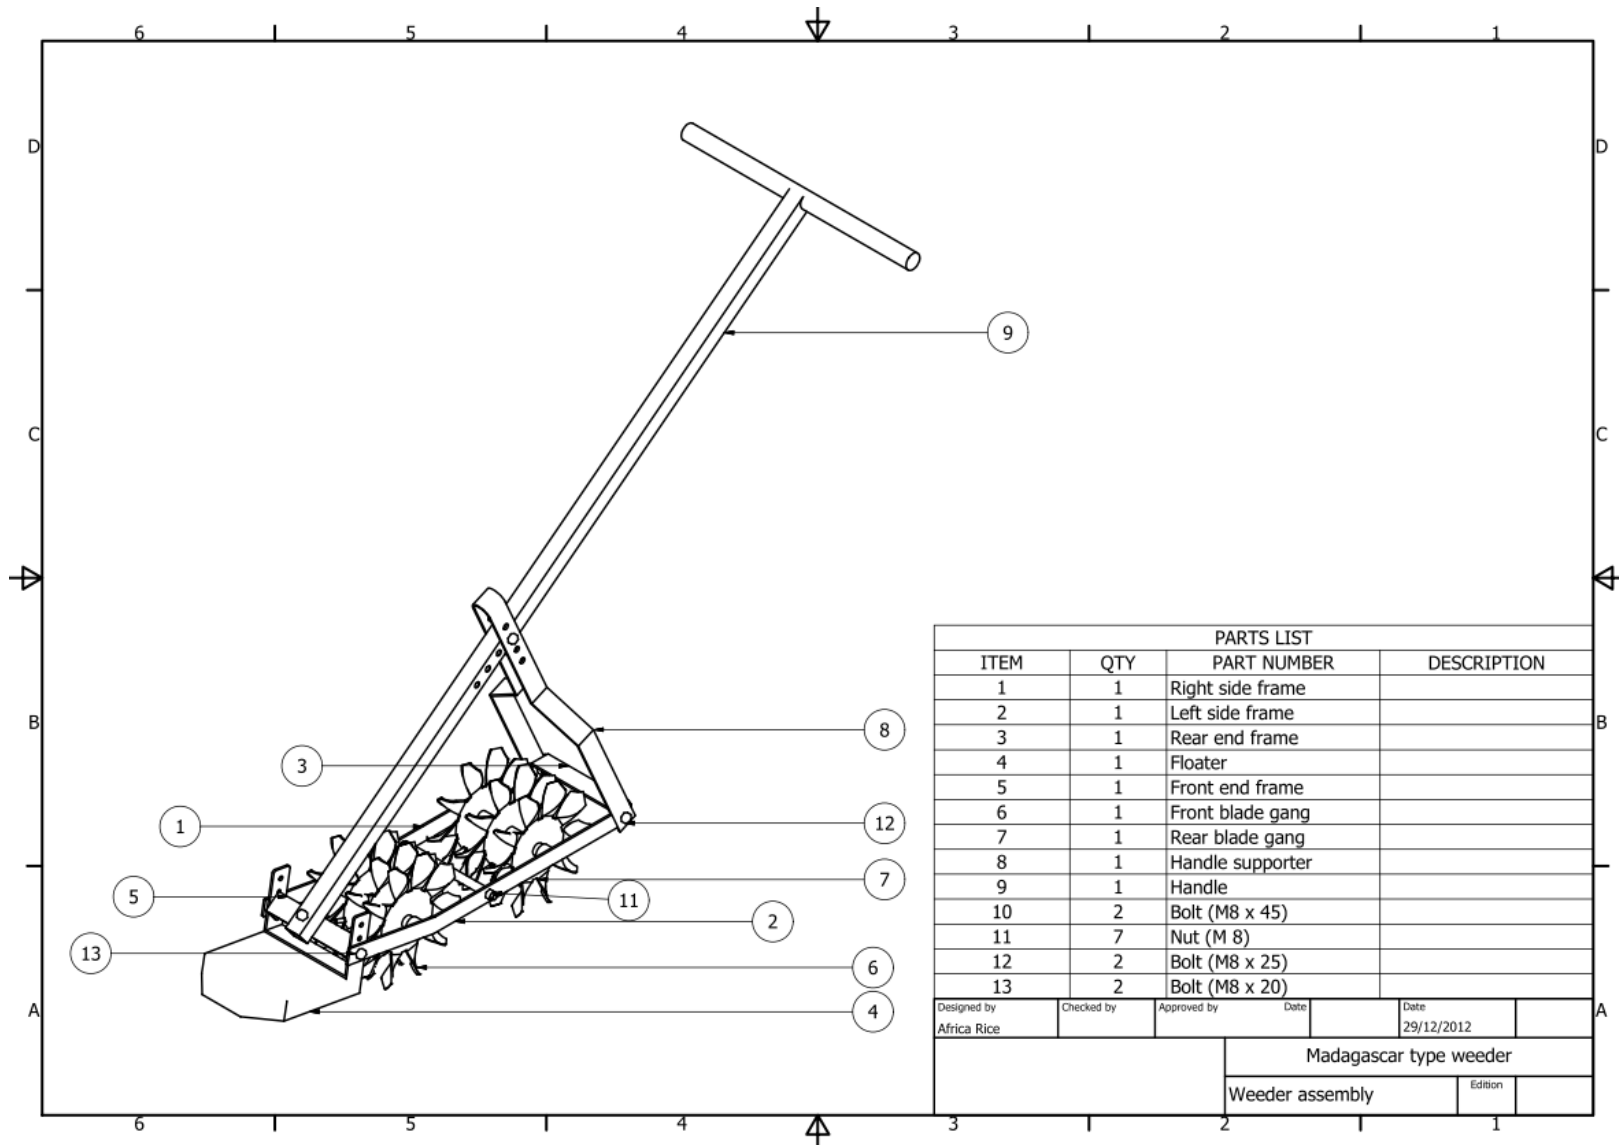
B: Technical drawing of the Twisted-Spike Floating Weeder assembly
